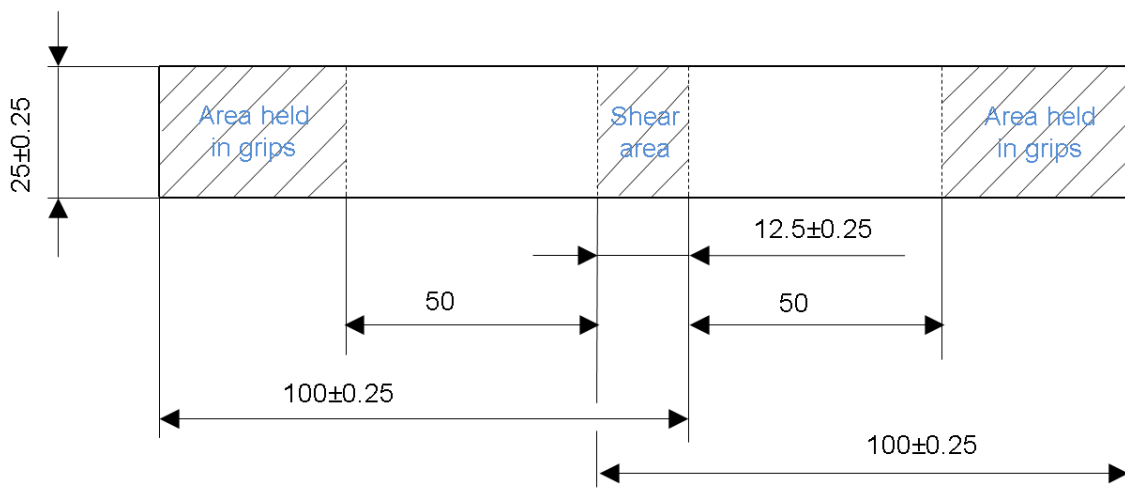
Dimensions and tolerances of joint (mm).
